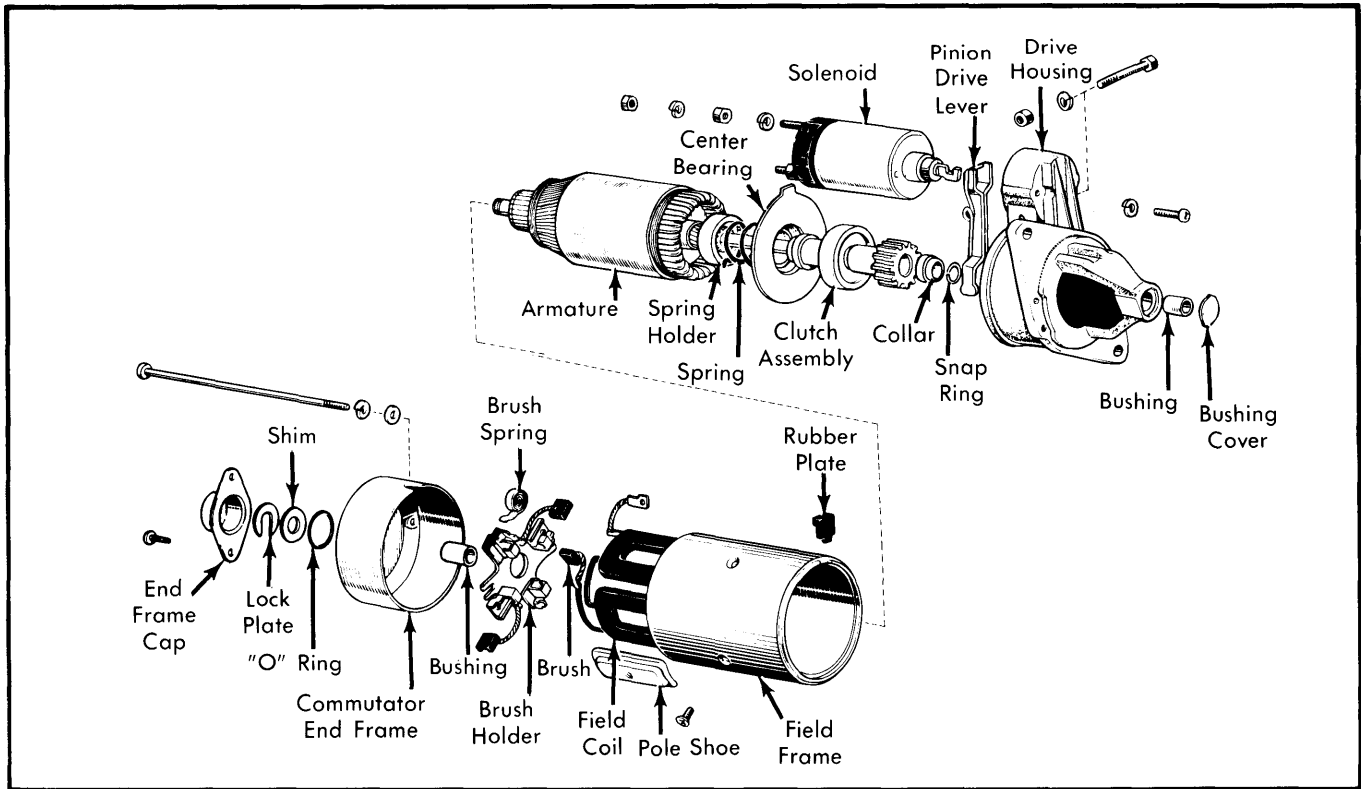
Disassembled View of Nippondenso Direct Drive Starter Motor
